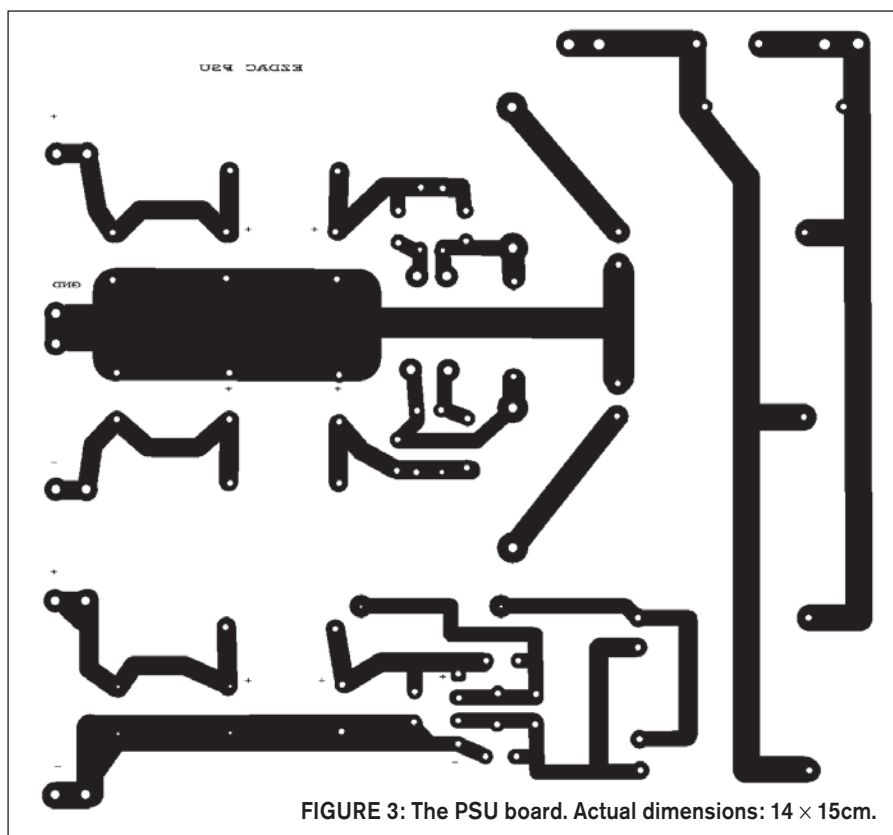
The PSU board. Actual dimensions: 14 × 15cm.
